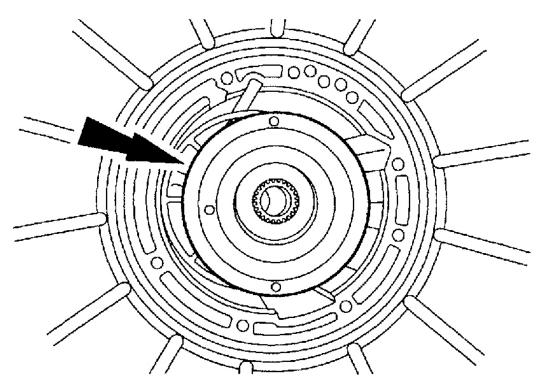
Installing Planetary Gear Overdrive Carrier
